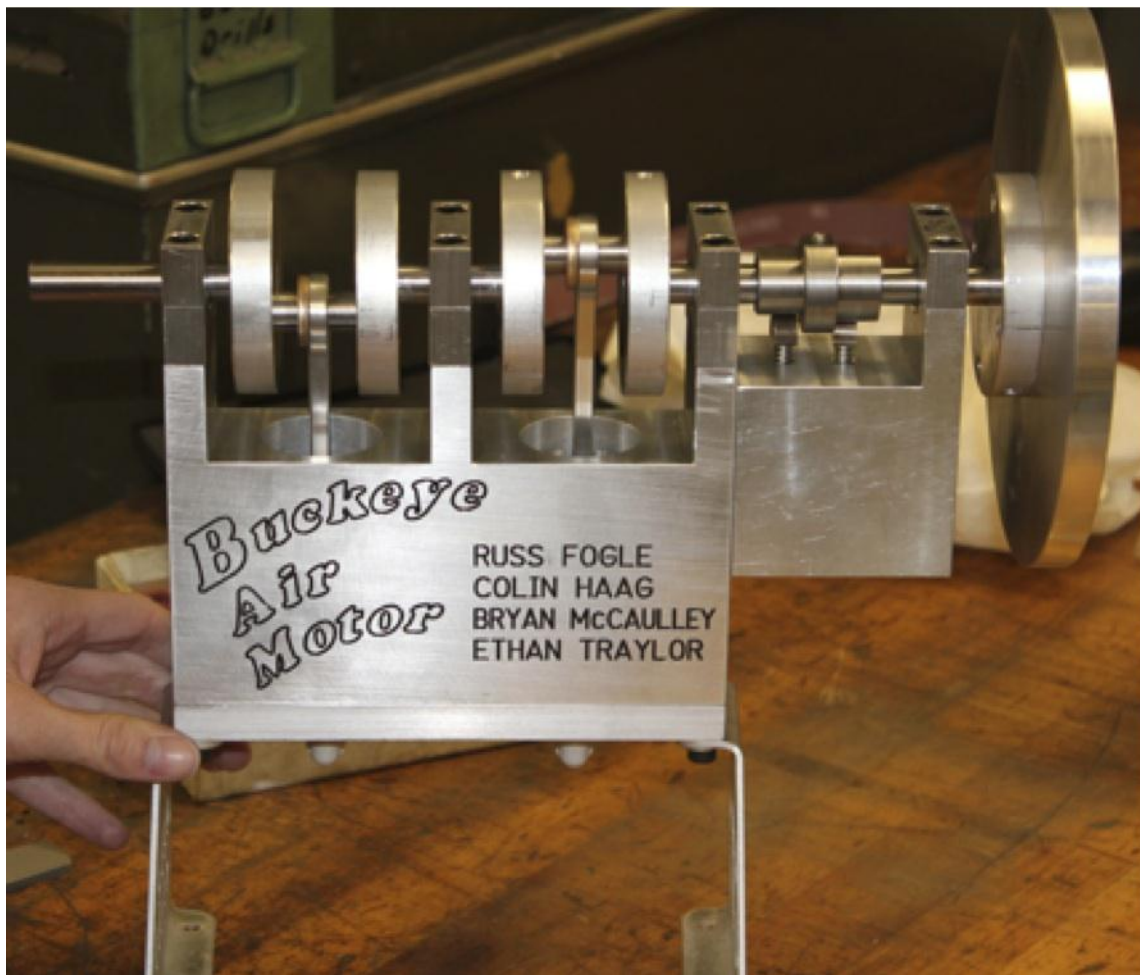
The first iteration of the air motor design. This two-cylinder motor requires a dual-lobe cam and followers to control air flow, and has over thirty separate components; most of which are machined by the students.
